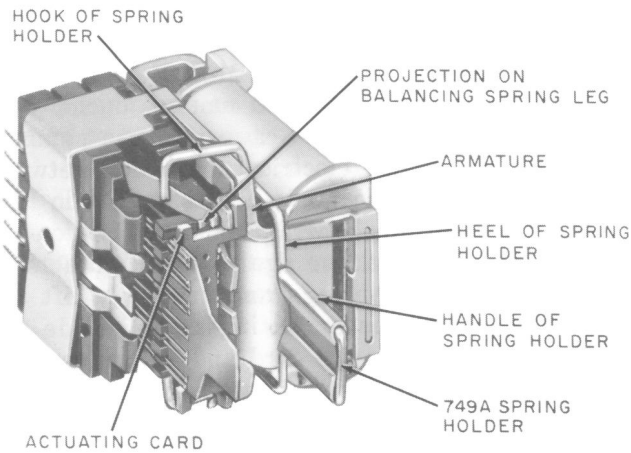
Positioning 749A Spring Holder for Removal of Actuating Card
